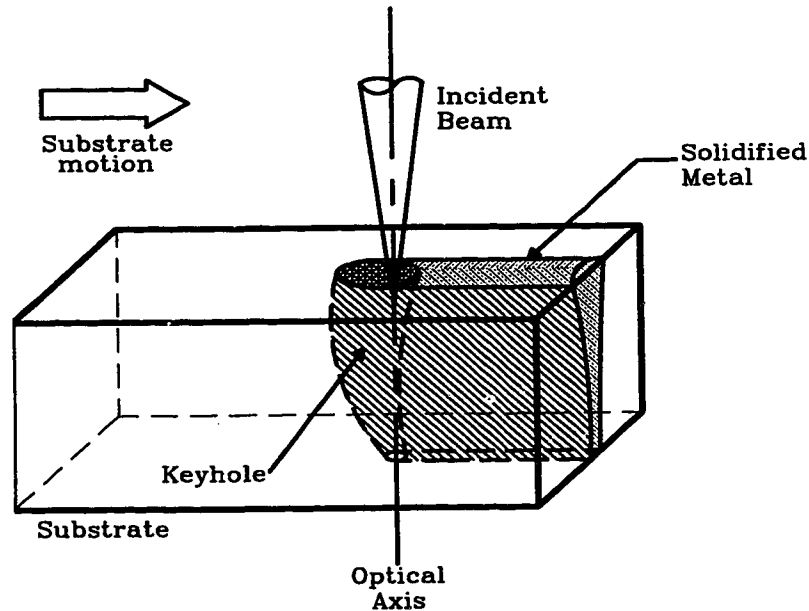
Schematic representation of the keyhole welding process.
